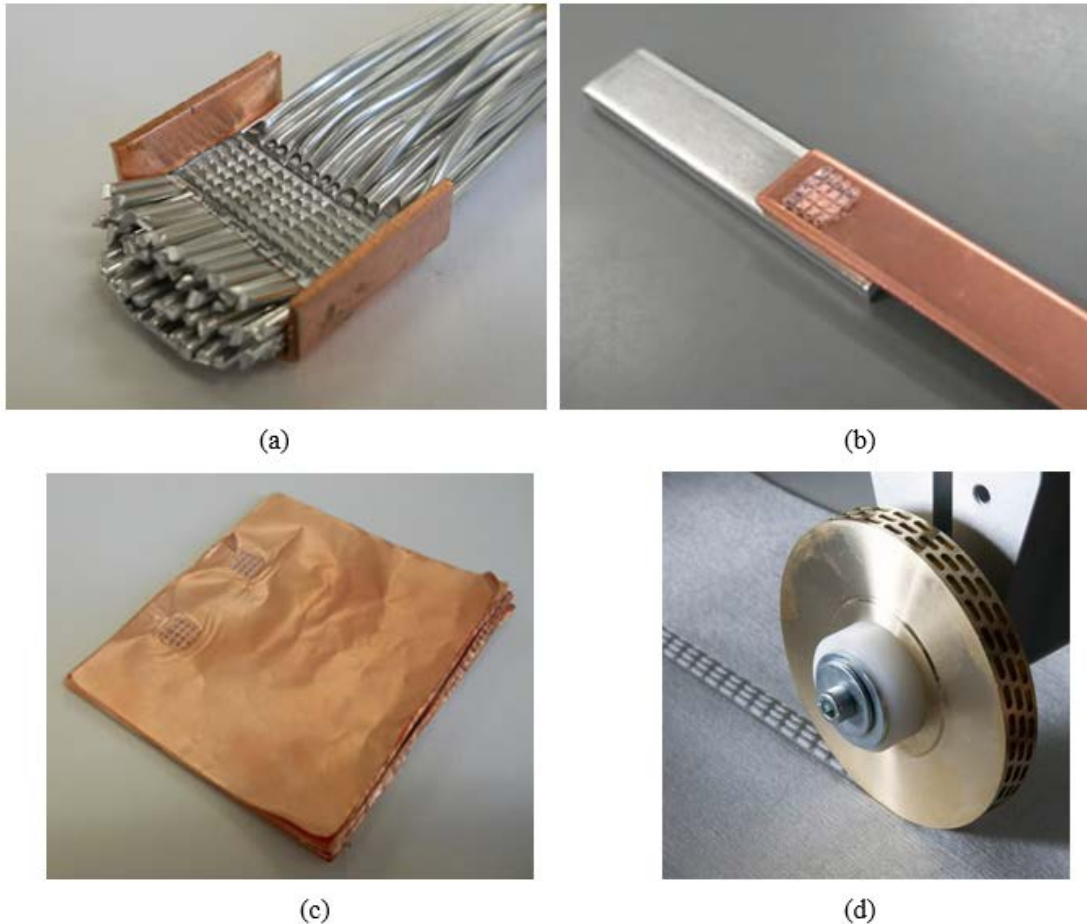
(A) AL WIRE WELDING ONTO CU; (B) CU AND AL WELDING; (C) MULTI-LAYERED CU FOIL WELDING; (D) ULTRASONIC SEAM WELDING
